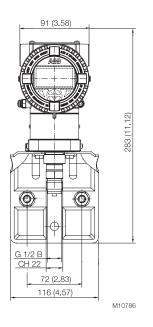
Dimensions - Barrel housing - DIN-EN837-1 G 1/2 B connection
